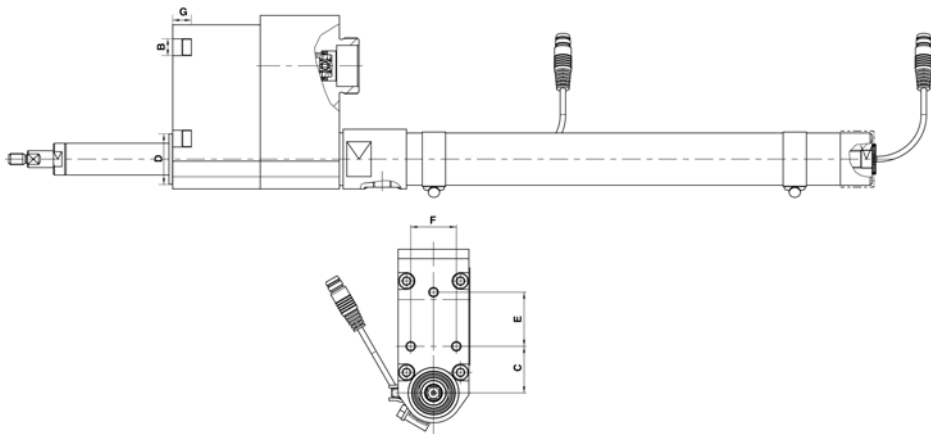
Main dimensions for the installation on a mounting plate (feed output drive)
